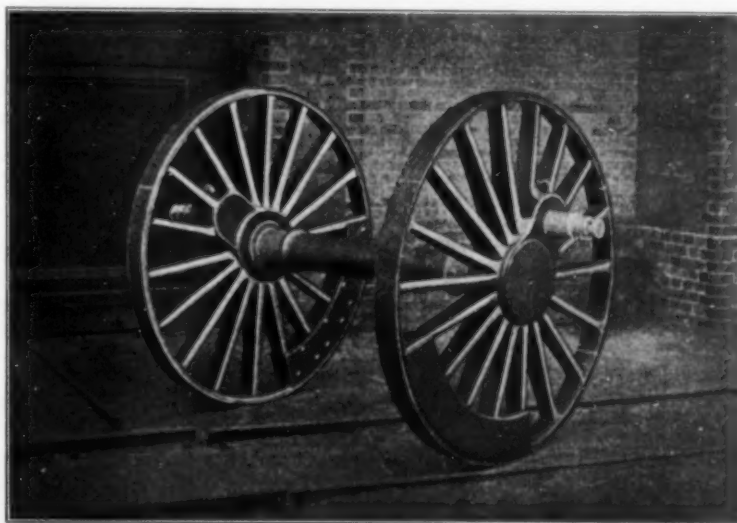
BROKEN DRIVING WHEEL (SHOWING CRACKS)
